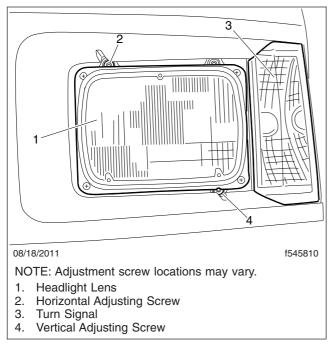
, Single Headlight Assembly (4700 model shown)
